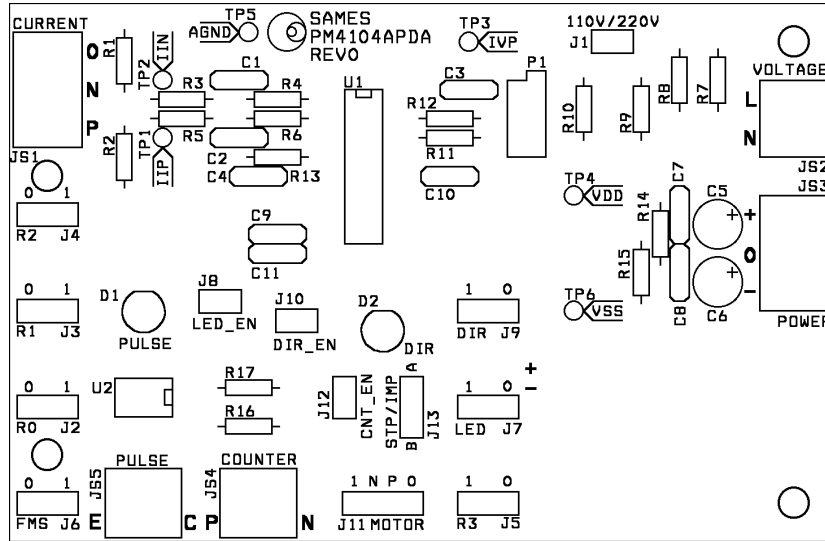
Top silkscreen layer of PCB (scale 1:1)
